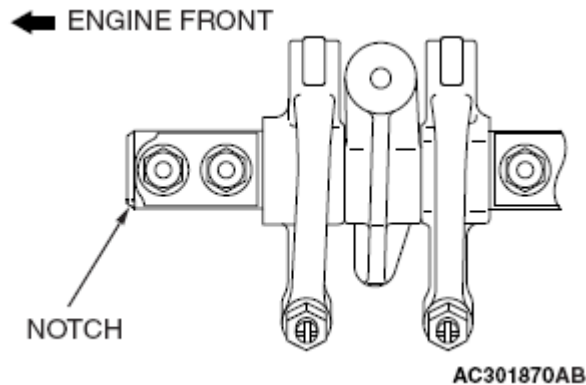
Exhaust Rocker Arm And Shaft Assembly Installation Direction
